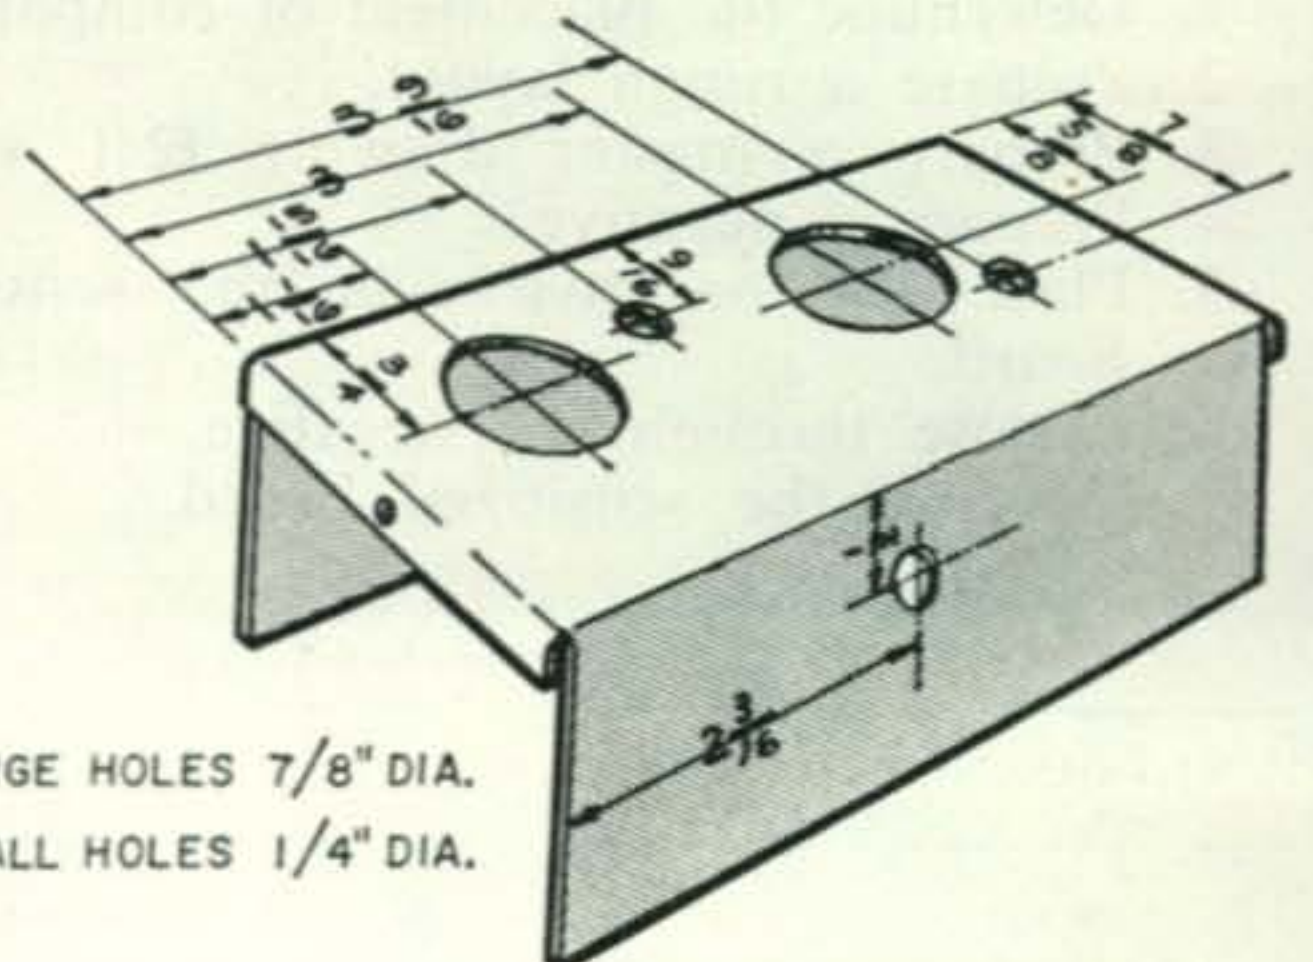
View of box cover showing location of holes and giving drilling instructions.
